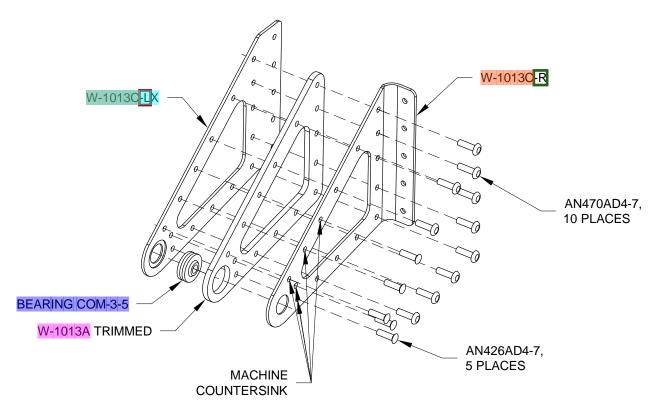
W-1014-L OUTBOARD AILERON BRACKET ASSEMBLY
